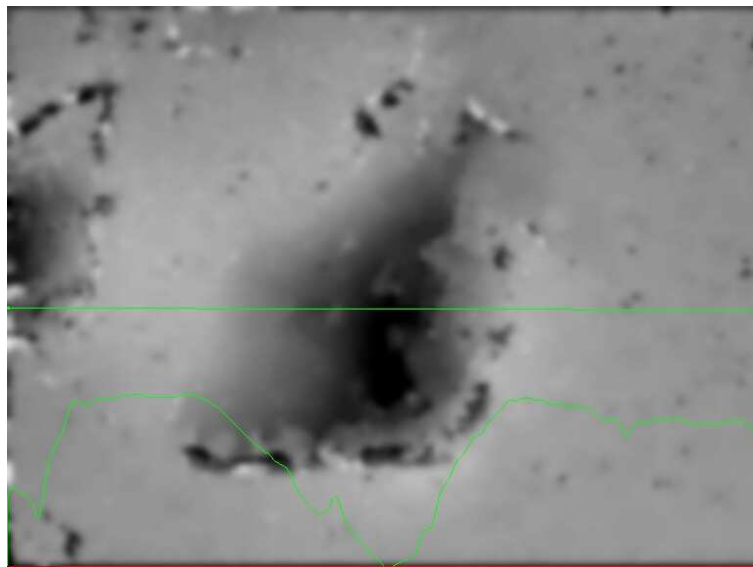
Footprint of a corundum particle (F60) on brass, intrusion depth approx. 65 μm
